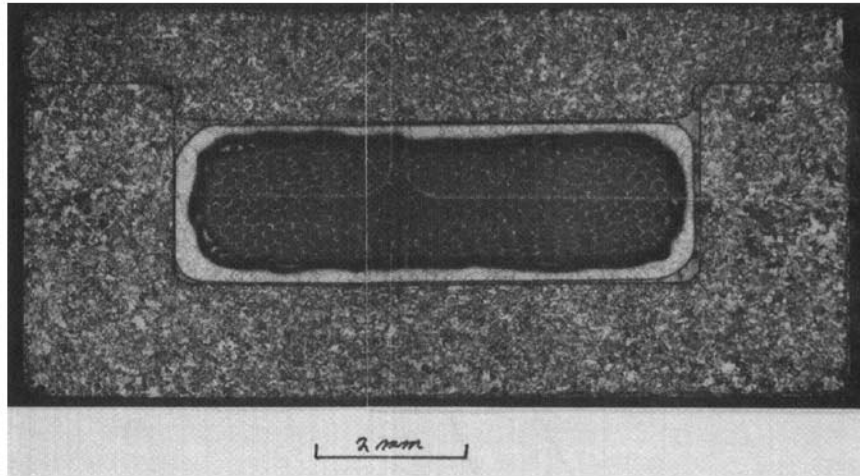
Cross-section of the conductor showing the cold-worked Cu cladding (U-shaped channel and "hat") with insert soldered in place.
